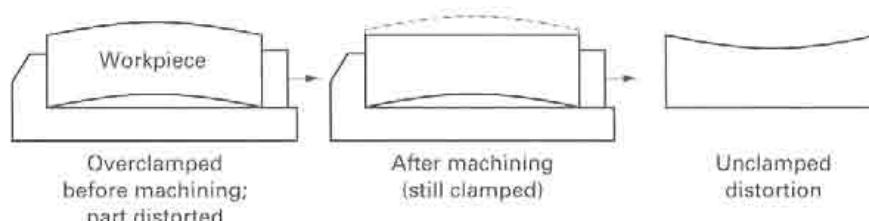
Exaggerated illustration of the manner in which excessive clamping forces can affect the final dimensions of a workpiece.
